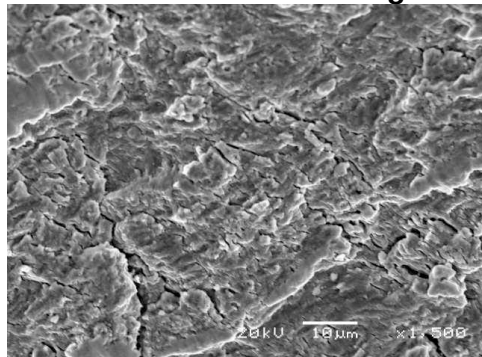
Fracture surface geometry showing fatigue striations; bolt no 5 (x1500, SEM)
